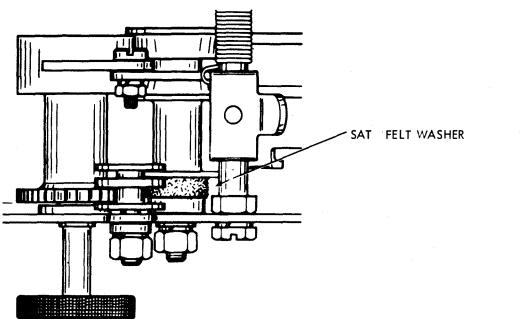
Main Shaft and Jack Shaft Mechanism, Two-Shaft Units
